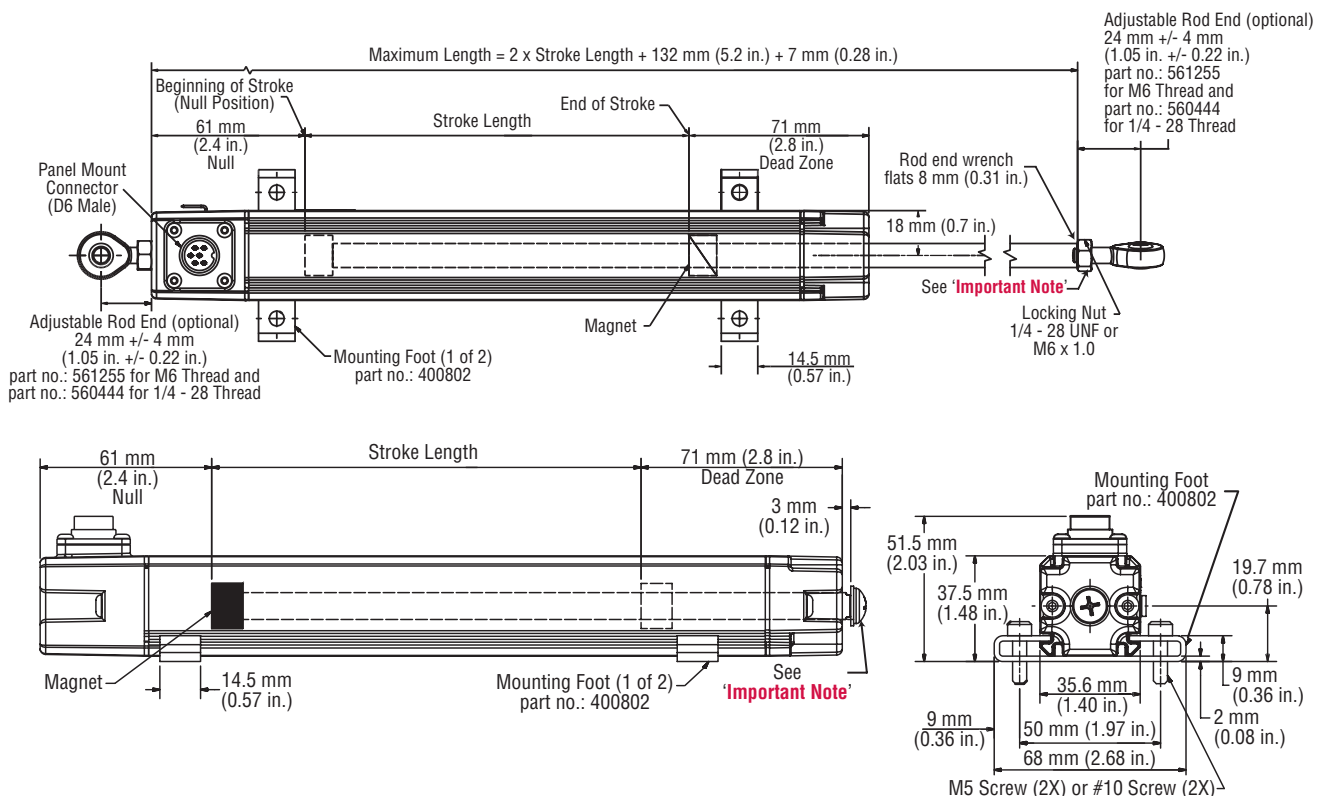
E-Series Model ER Rod-and-Cylinder sensor dimension reference (Shown with a D60 integral connector)
